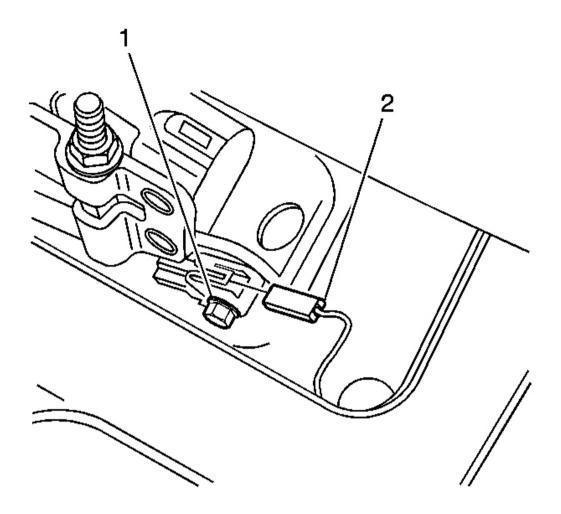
View Of Park Brake Warning Lamp Switch Courtesy of GENERAL MOTORS CORP.
